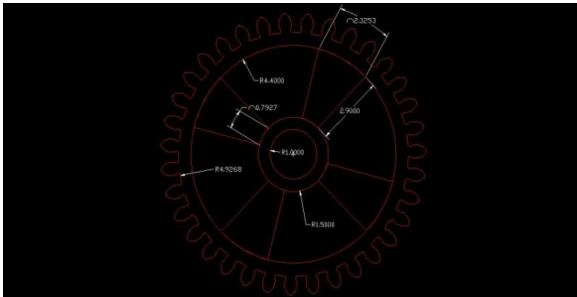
(Front view and dimension of Pinion gear) Fig 3.3.7: (3D view of Pinion gear)
